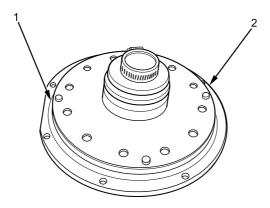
Overpressure Relief Valve Shield Assembly Mounting.
